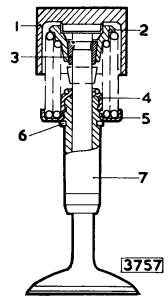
1 Tappet 2 Valve collar 3 Cotters 4 Oil seal 5 Spring seat 6 Circlip 7 Inlet valve guide
